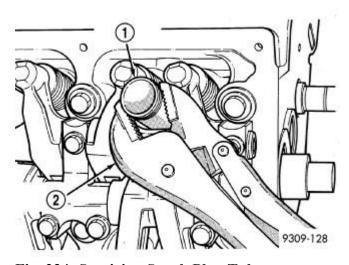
Servicing Spark Plug Tubes Courtesy of CHRYSLER LLC
